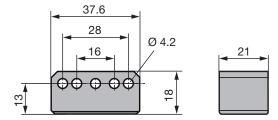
Installation dimensions of BTL6-A-3801-2 magnet
